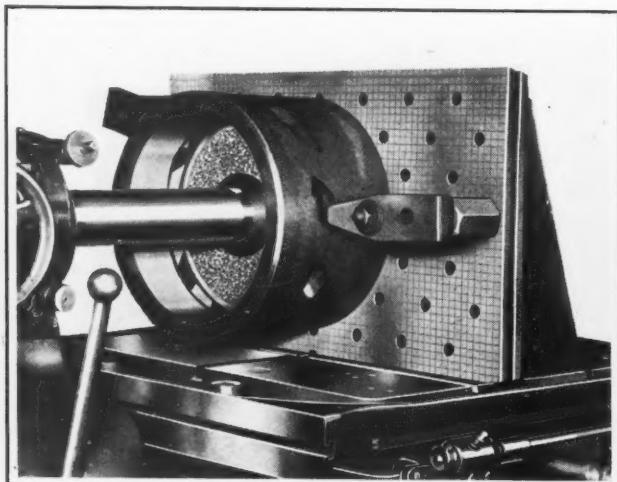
Grinding a Valve Chest Bushing by Clamping it to the Angle Platen
